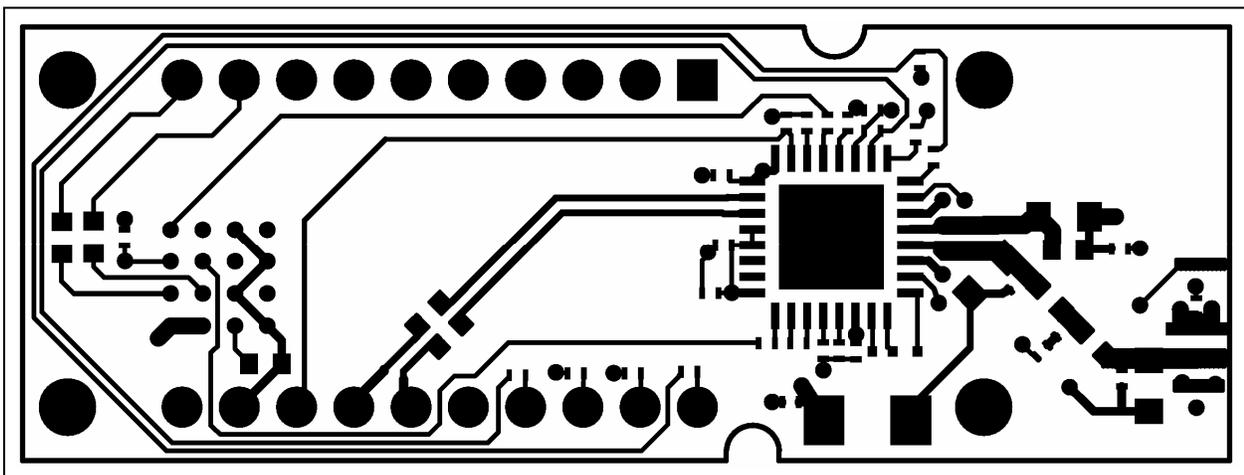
HFRD-2.0A PC Board Layout – Component Side
